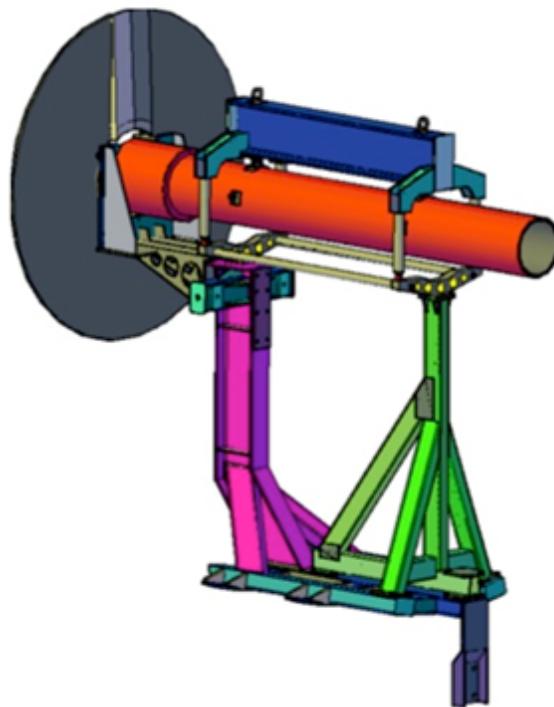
General layout of the beam pipe and bulkhead shielding.
